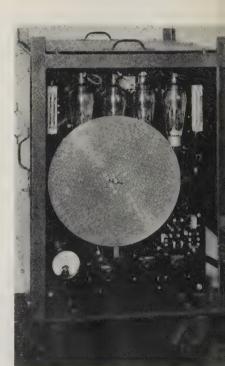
The simplified ignitron seam - welding control unit
